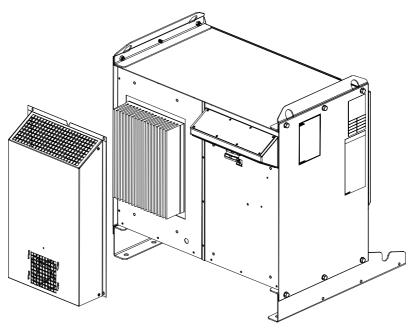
Exploded view drawing showing fan assembly at the rear of the Spot Welding cabinet.
